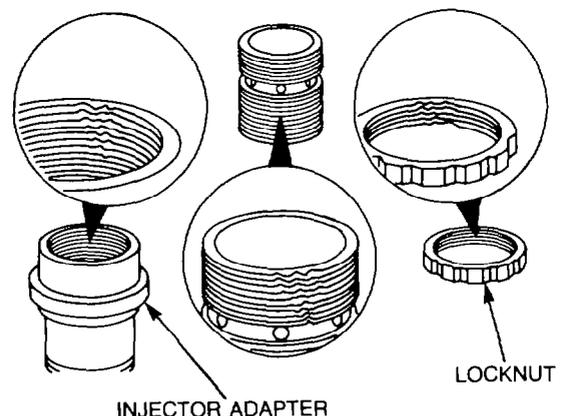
Stop Screw, Lock Nut and Injector Adapter — Inspection
